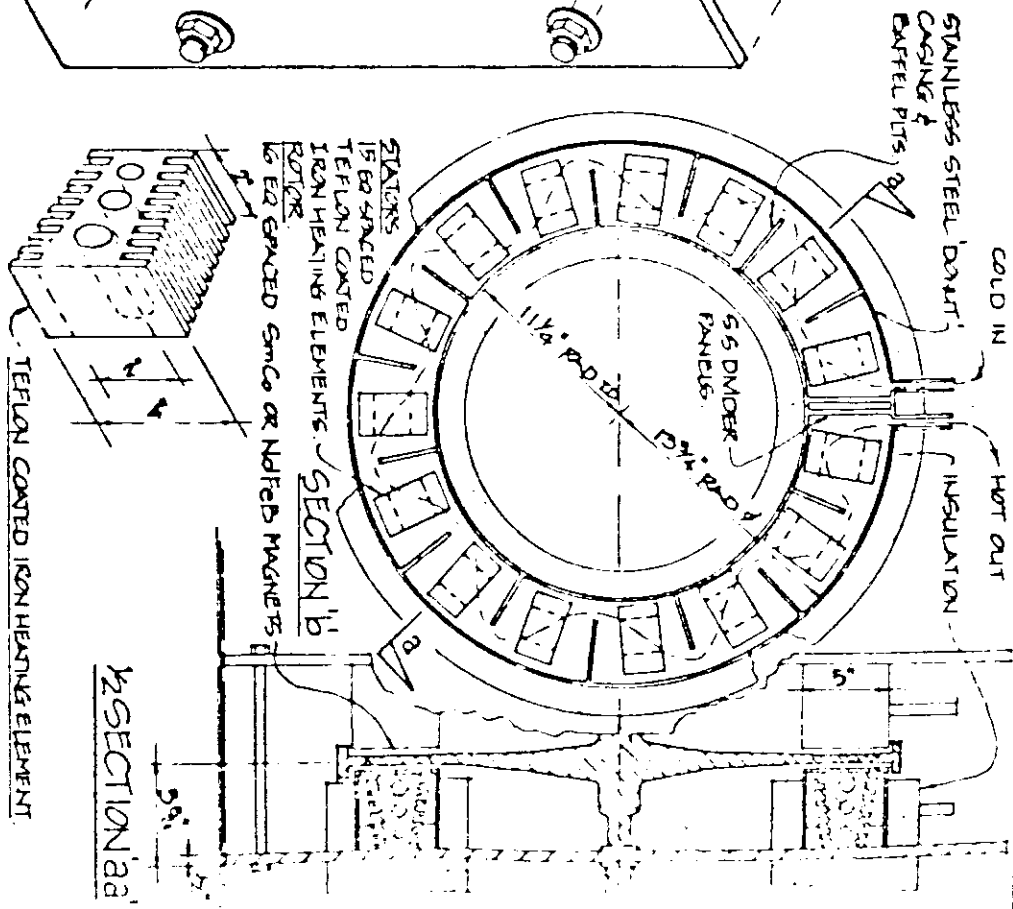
DETAILS - ROTOR, OUTPUT COIL & IMPULSE MOTOR
